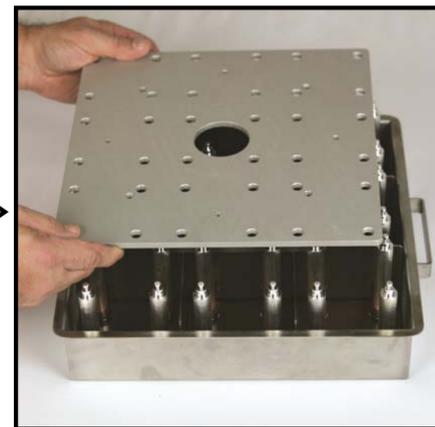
Now lift the Plug Plate exposing the Dividers and Divider Plate. No further disassembly is required beyond this point.
